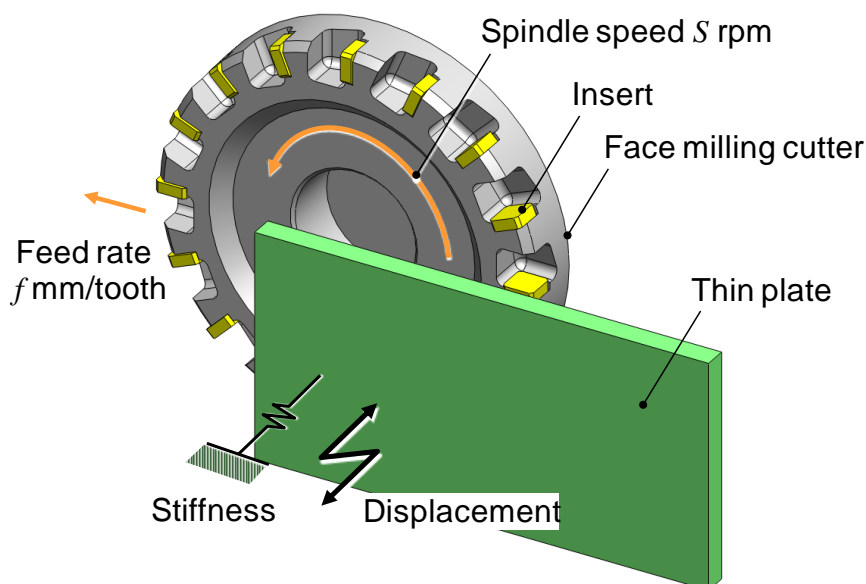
Deformation of a thin wall workpiece during cutting with a face milling cutter.
